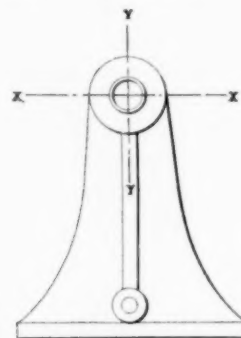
BEARING FOR SHAFT SHOWN IN FIG. 7
